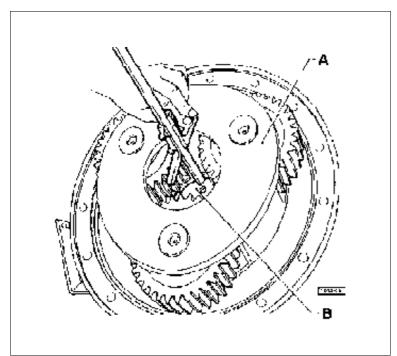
Halfshaft securing plate. A - Planet carrier housing
